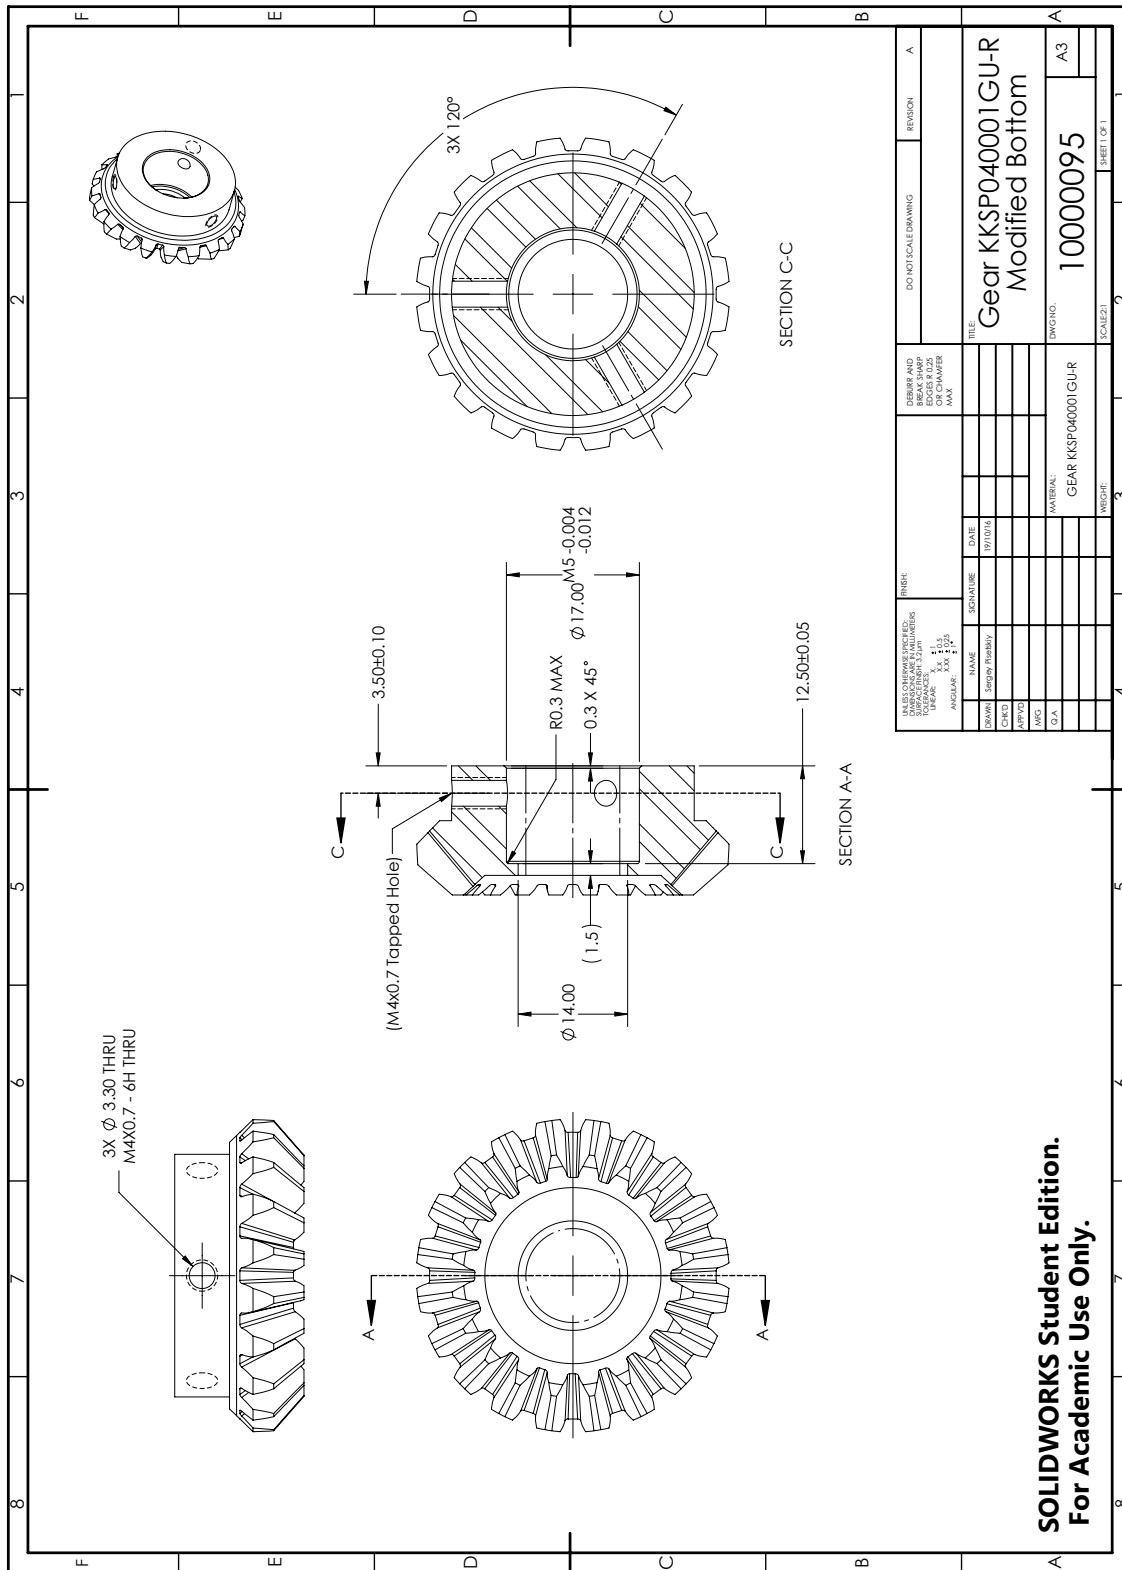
Drawing: Gear KKSP040001GUR modified, bottom.
